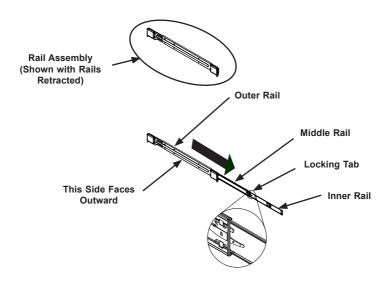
Identifying the Outer, Middle, and Inner Rails (Left Rail Assembly Shown)
